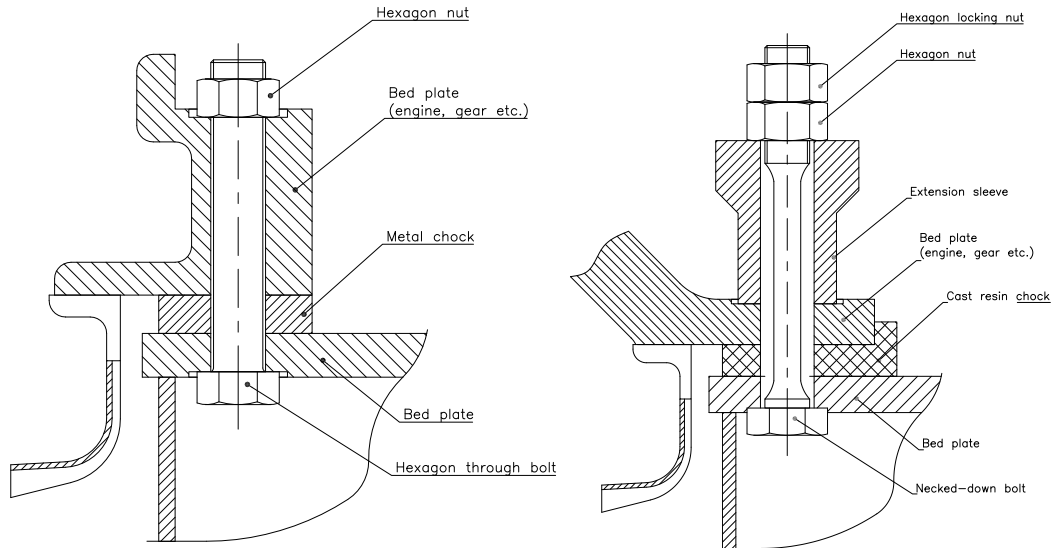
illustrates mounting on steel blocks or resin chocks.
